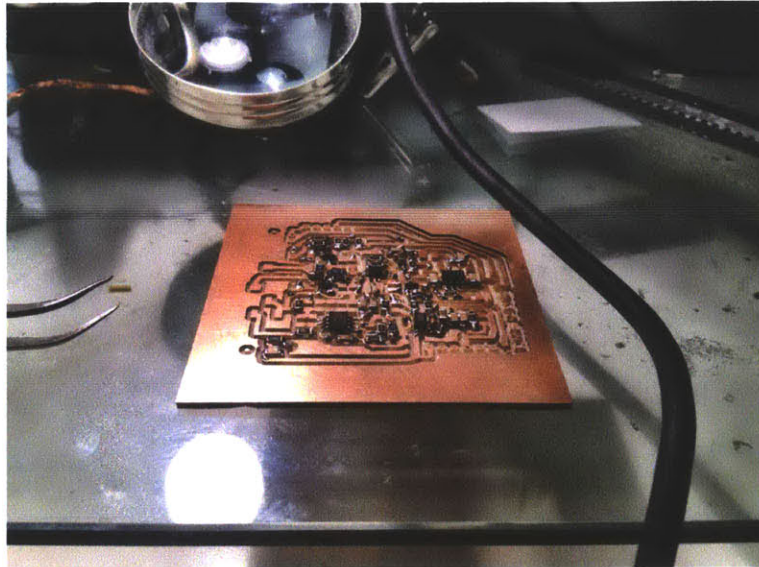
uircuit board prototype 2, copper board milled , SD card reader and EMG.
